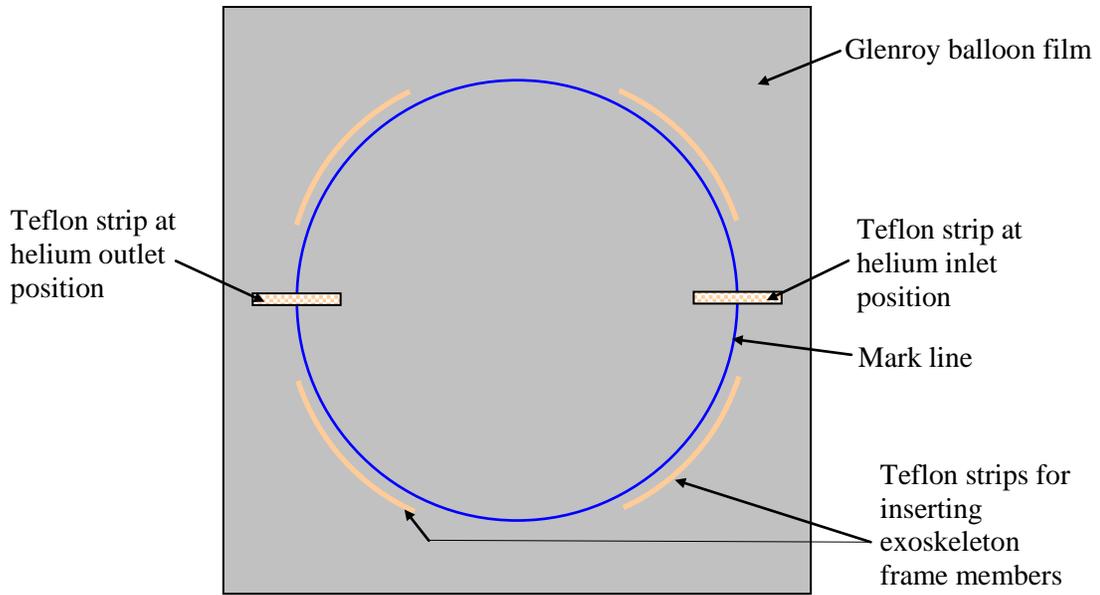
Inlet and Outlet Tab Making using Teflon Film Strips
